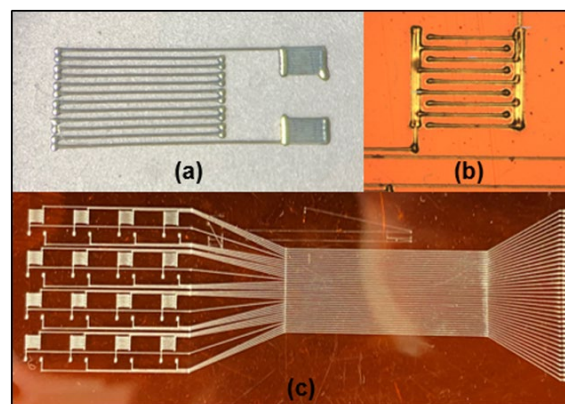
(a) a strain gauge with pads printed on a glass slide, (b) interdigitated fingers on Kapton, (c) a skin sensor array printed on Kapton
